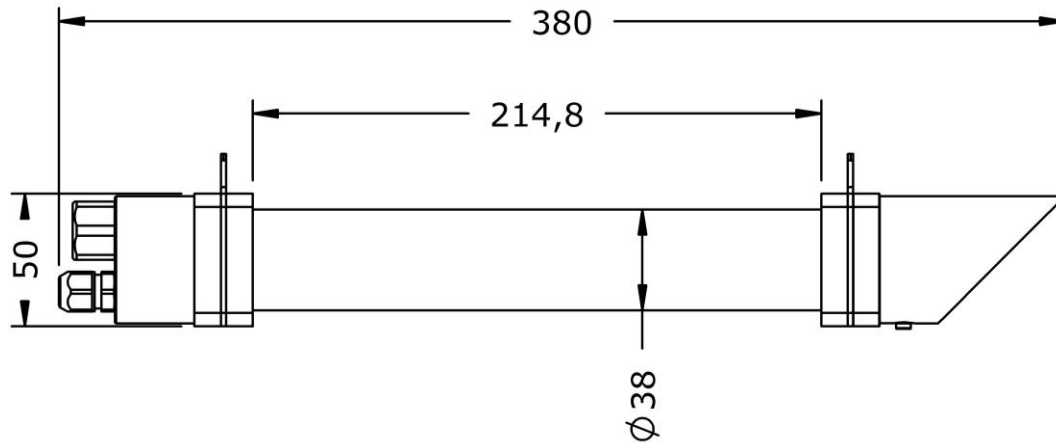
Dimensions of DR01 in mm. Tube diameter is 38 mm, approximately 1.5 inch.
